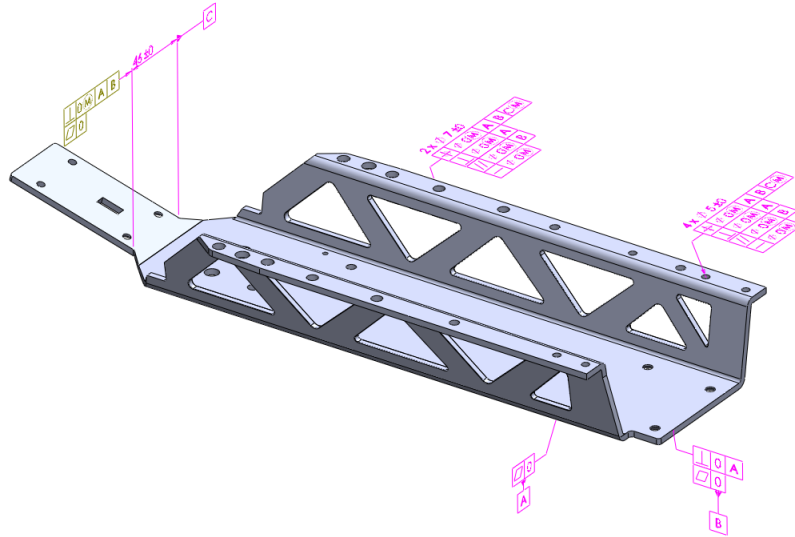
26: Form Tolerance Frames for the Chassis
